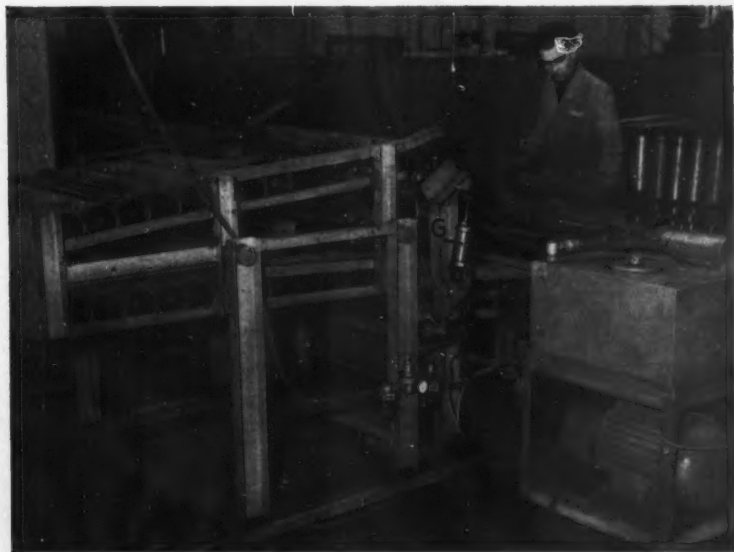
This cooling rack, into which the heated tubes are delivered, serves the swaging machine. The final section of the roller conveyor is tilted sideways, by the pneumatic ram *G*, to discharge the tubes into the rack
